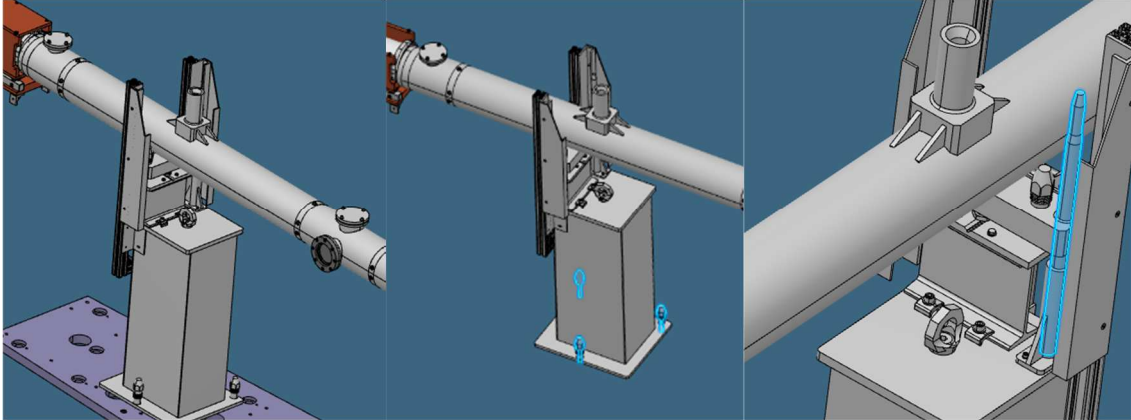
CAD view of the first guide support in the remote handling region. Figure 25 CAD view of the first support with the self-catching bolt in blue. Figure 26 CAD view of the guiding rod for the extraction of the first vacuum housing
